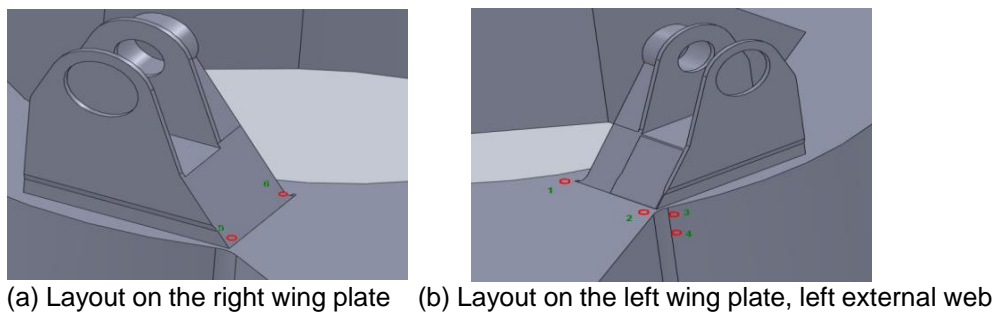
Sensor Arrangement Scheme No.2 for the Slew Deck with Pylon Cracks
